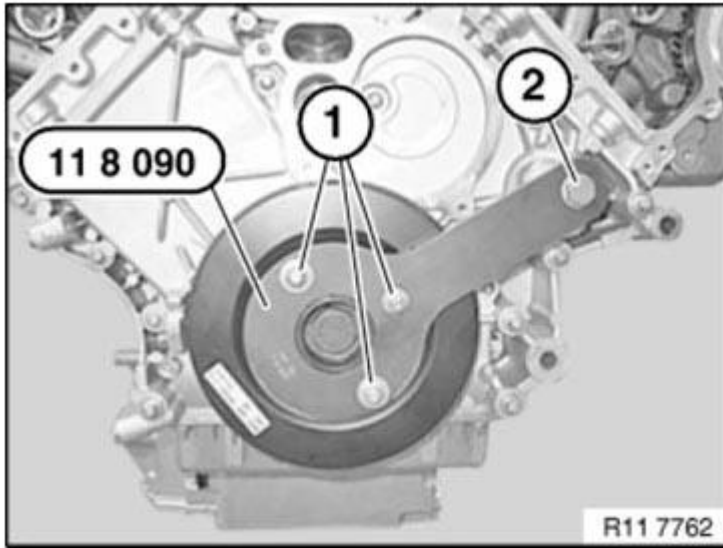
Securing Special Tool 11 8 090 With Belt Tensioner Bolt And Screws
